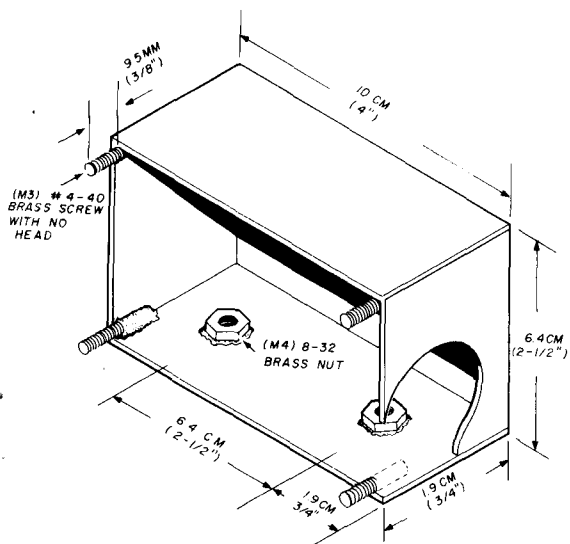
Construction details of the analog modules. Each box is constructed from pieces of circuit board soldered into the desired shape and size.
